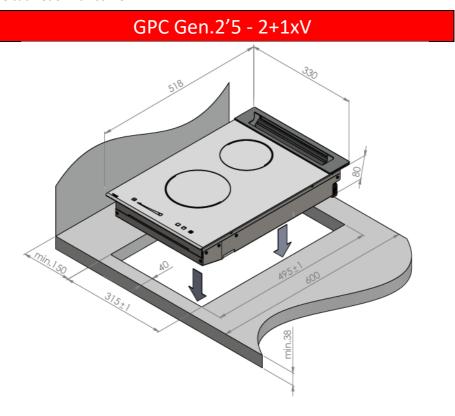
Dimensions and method of mounting the GPC Gen.2'5 2+1xV cooker
